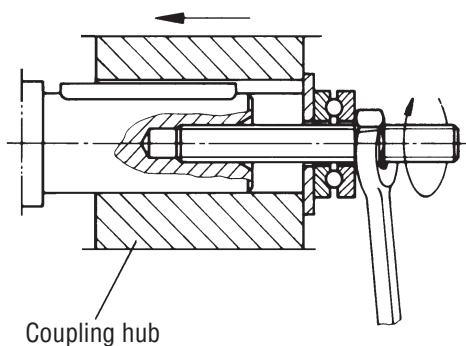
Example of a mounting device for mounting couplings or hubs onto gear unit or motor shaft ends. It may be possible to dispense with the thrust bearing on the mounting device.
